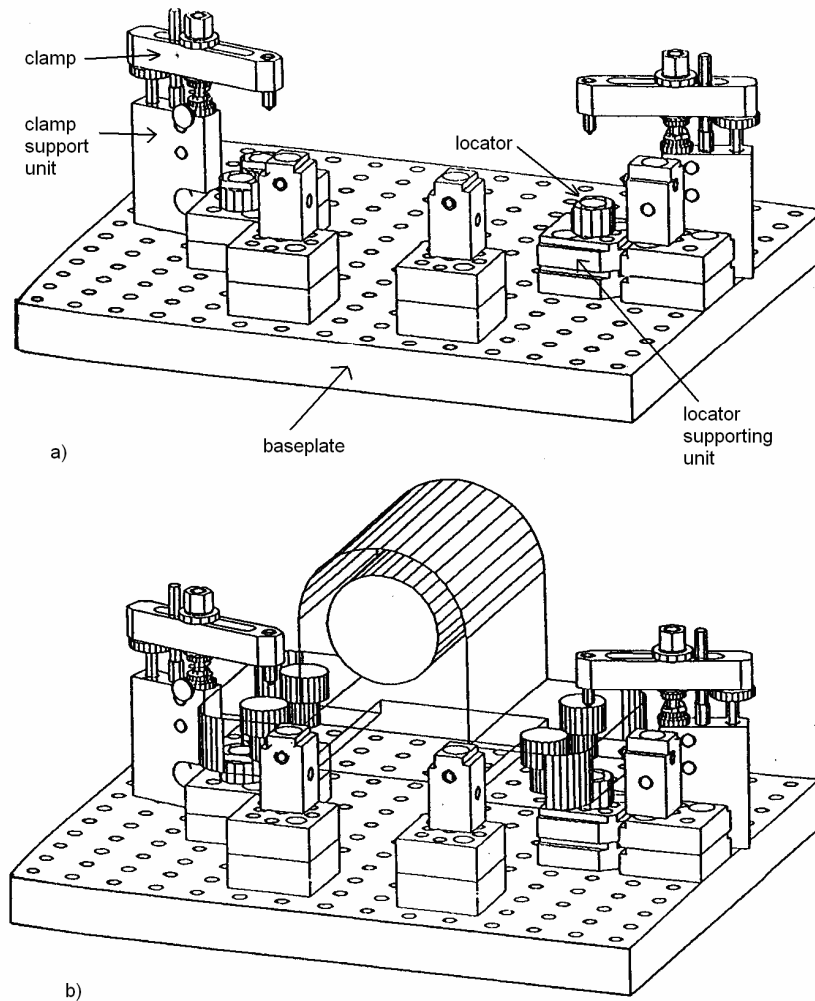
A typical modular fixture, shown a) without and b) with a workpiece (Rong, 1999)
